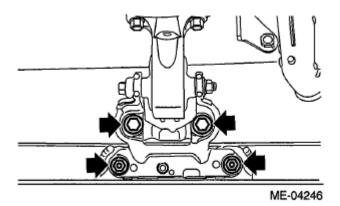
Locating Engine Mounting Bolts Courtesy of SUBARU OF AMERICA, INC.
